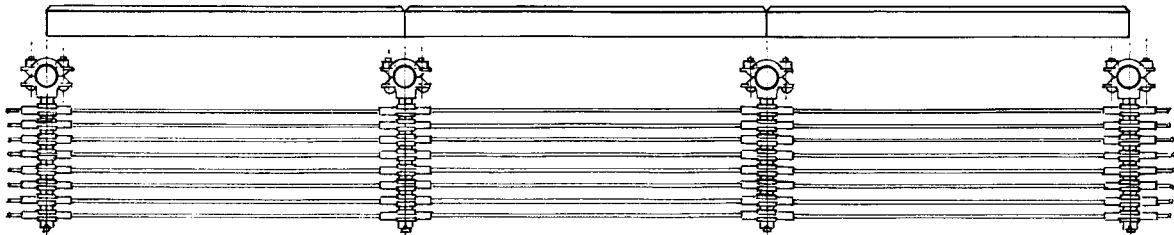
Plan View of Instrument and Control Bus Mounted on Slate Panel with Pipe Frame.
